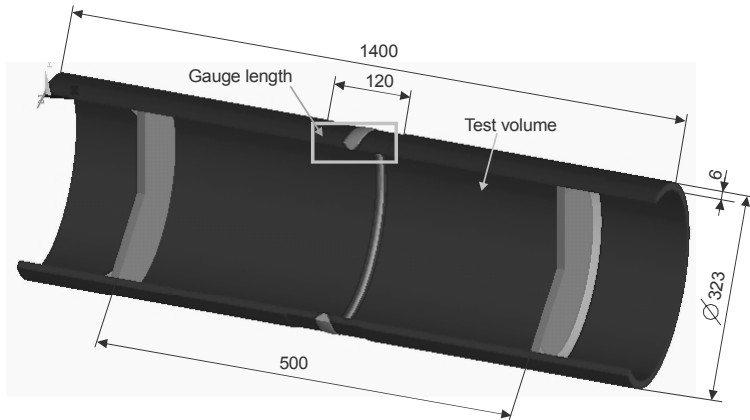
Dimensions of supermartensitic stainless steel pipeline orbitally welded with four layers of matching filler wires materials.
